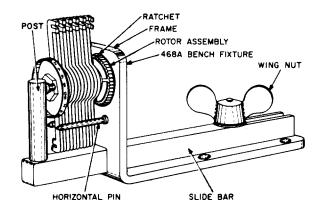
Mounting Hollow Shaft Rotor Assembly of Selectors and Switches
